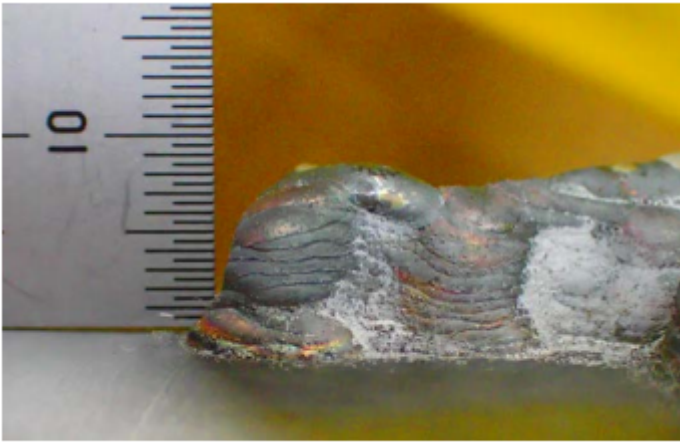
Photograph of deposit by the DED method in SKD11 (60 HRC)
